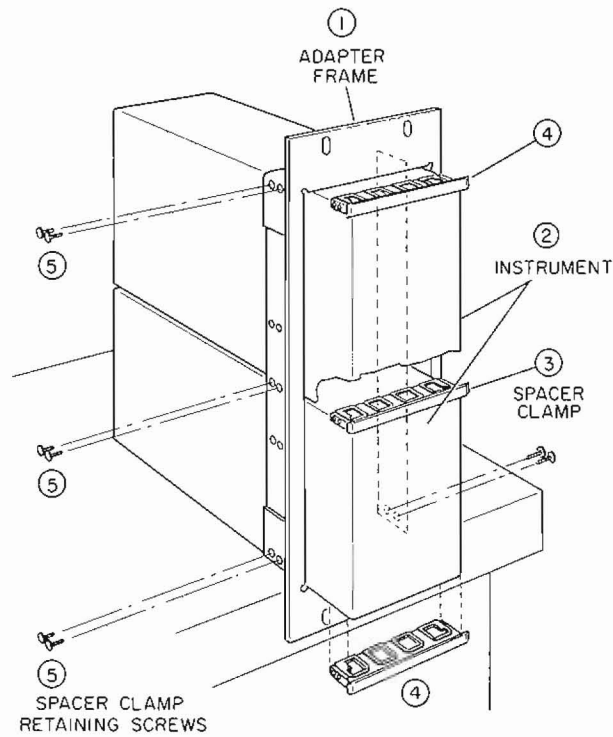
Mounting Sub-Module Units into Adapter Frame
